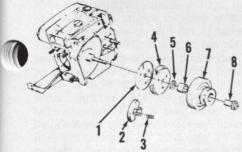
Exploded view of clutch used on Model XL98A Multi-Purpose Saw.
